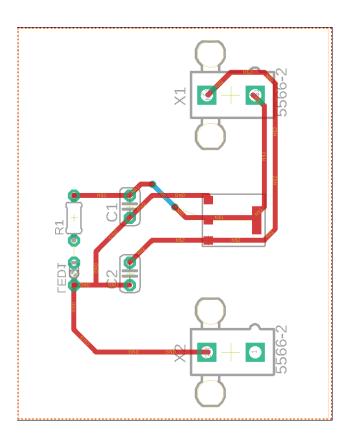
PCB design of 1st project's LM1117 Voltage Regulator
